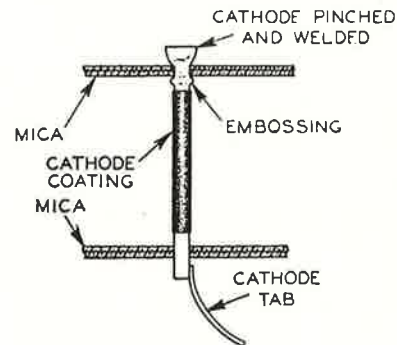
Diagram of inverted, pinched and welded cathode assembly employed.
